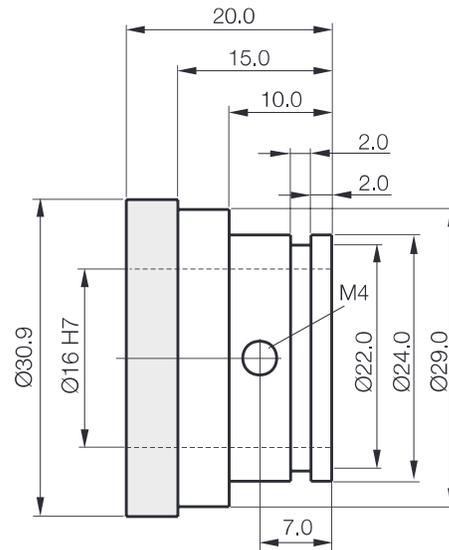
BML-M22-I40-A0-M031/016-R0 dimensions
